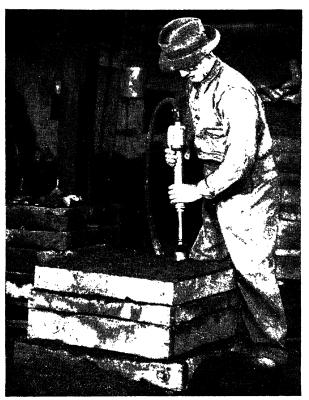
Ramming a small mold. (Ingersoll-Rand.)
